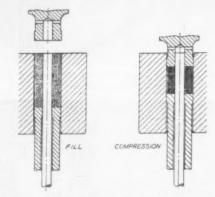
DIE, CORE BOD, TOP AND BOTTOM PUNCHES IN FILL POSITION, AND IN COMPRESSED POSITION FOR MAKING A STRAIGHT BUSHING
